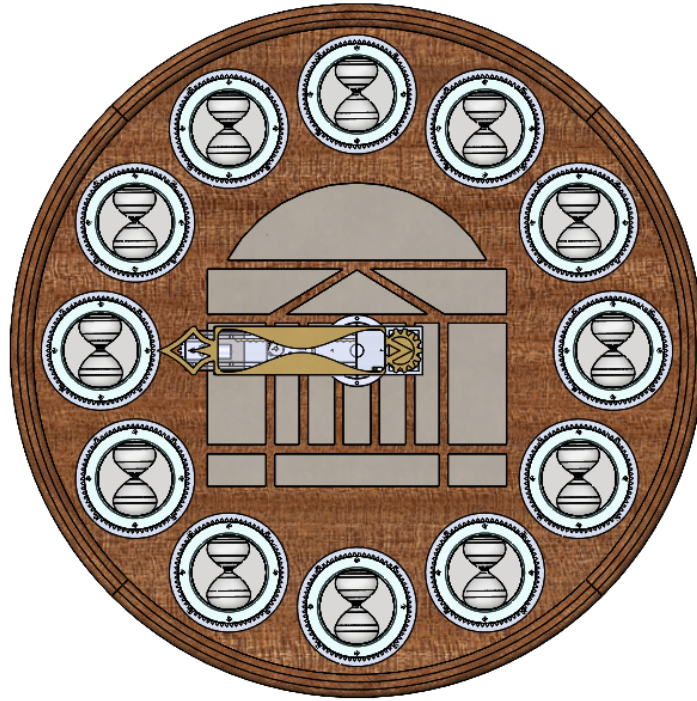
Final, Complete Clock Assembly, Incorporating Hourglass Assemblies and Robotic Arm
